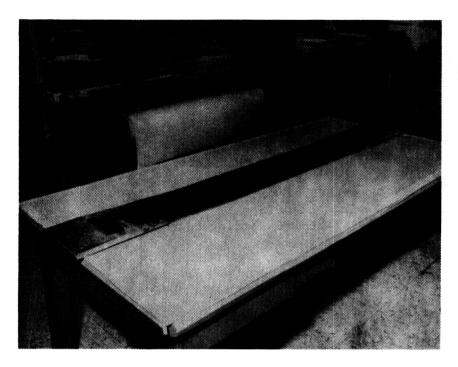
Interior Side of the Skin Panel After Removal from Tool
